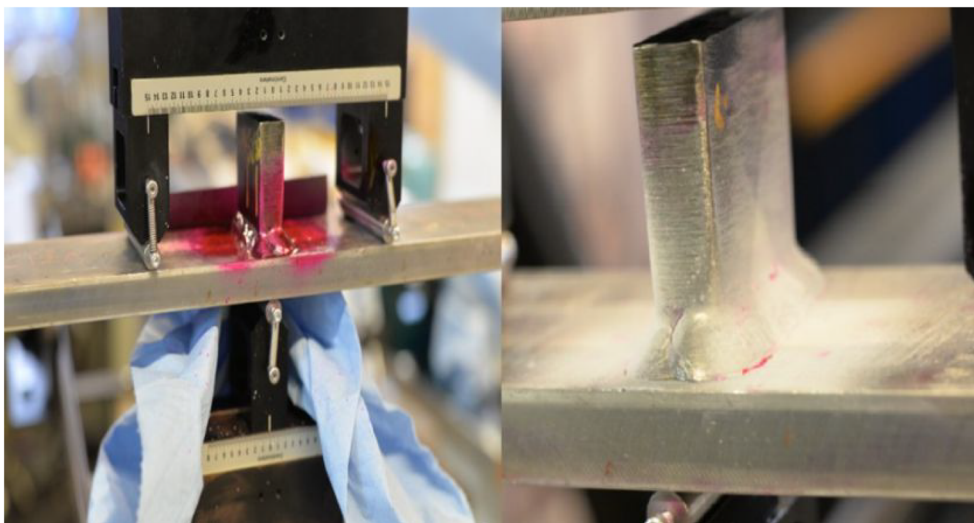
Red dye penetrant to expose the crack surface
